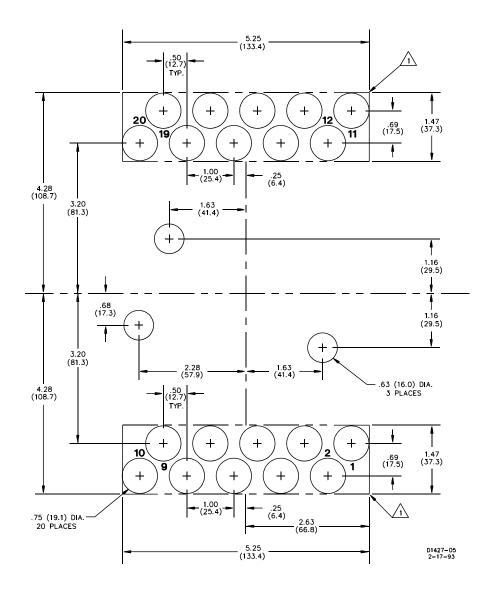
S1 Case, Double-Ended, Projection Mounting, Panel Drilling Diagram, Rear View
